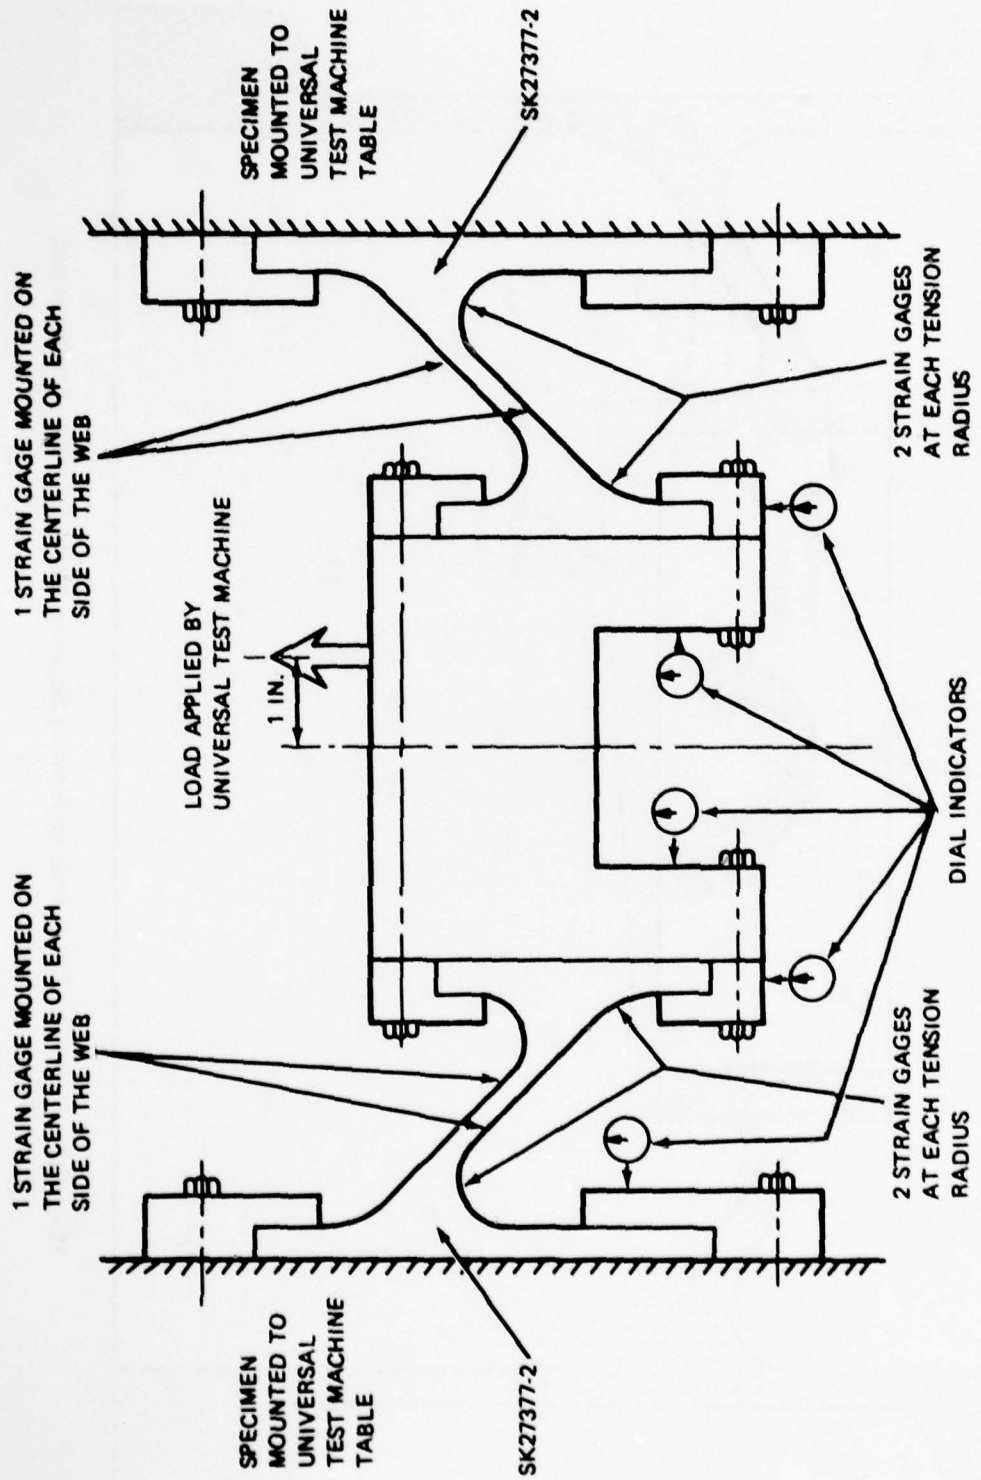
Simulated Test Setup of the Outer Rim, Inner Rim, and Web Component Assembly (SK27378) Using Two SK27377 Components.
